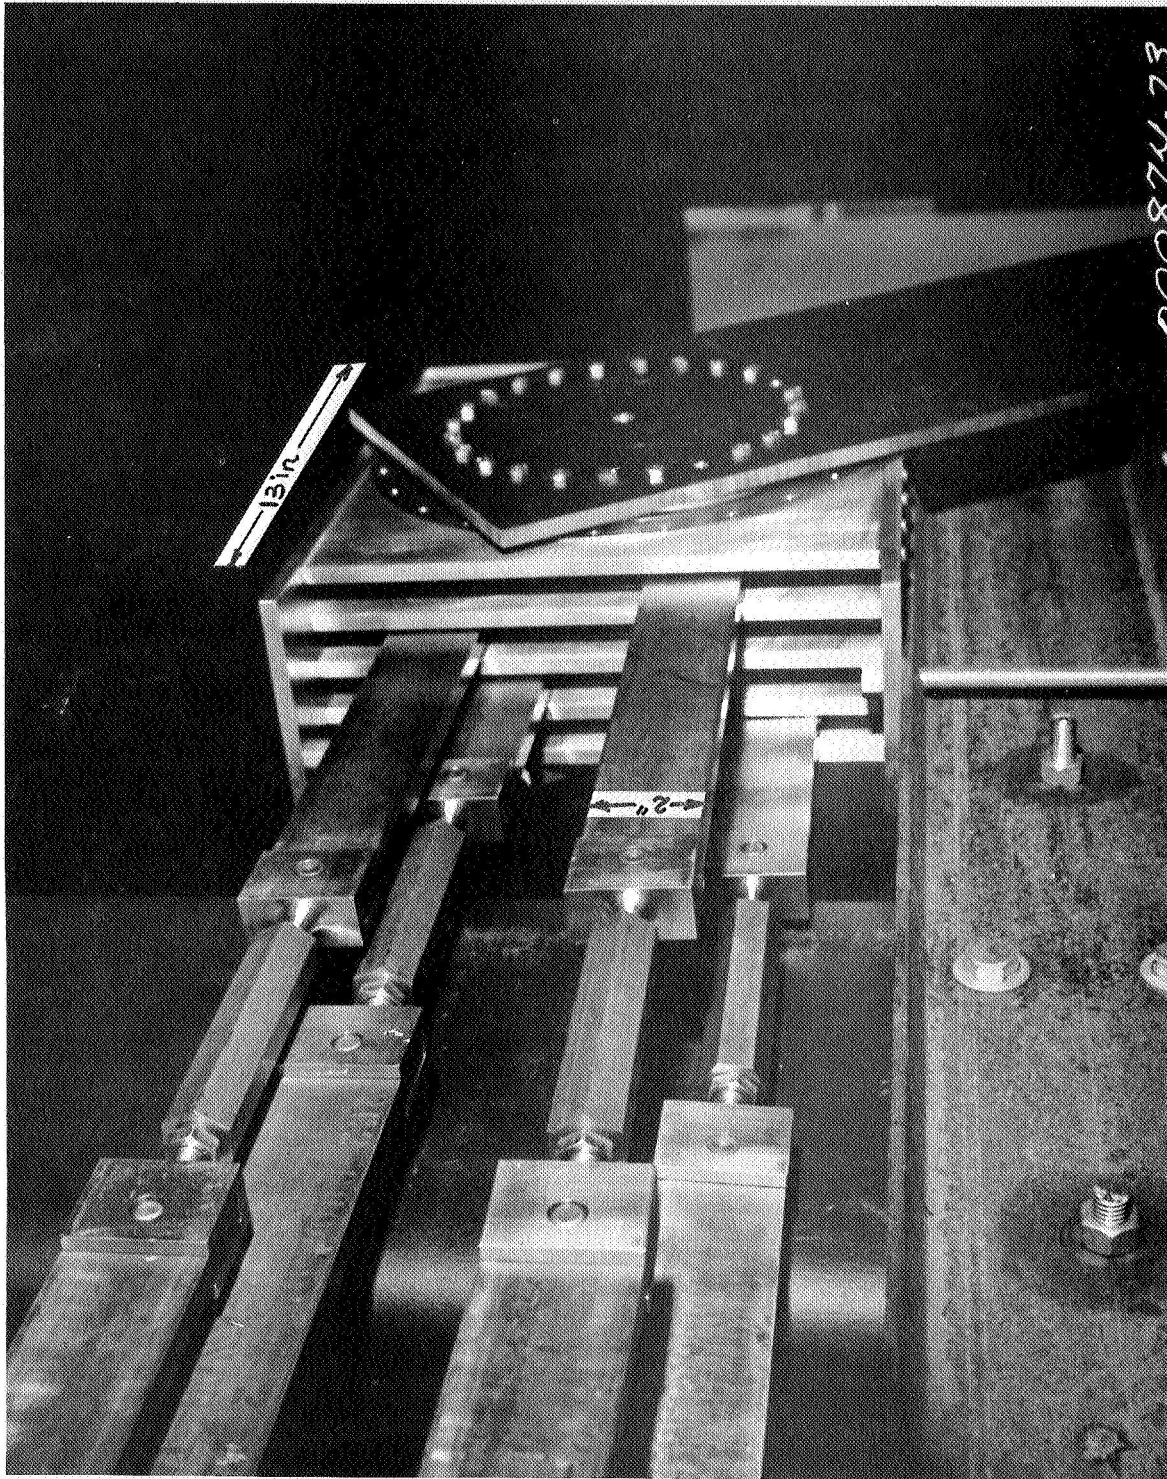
Four Bar Test Setup Showing Crank Assembly
